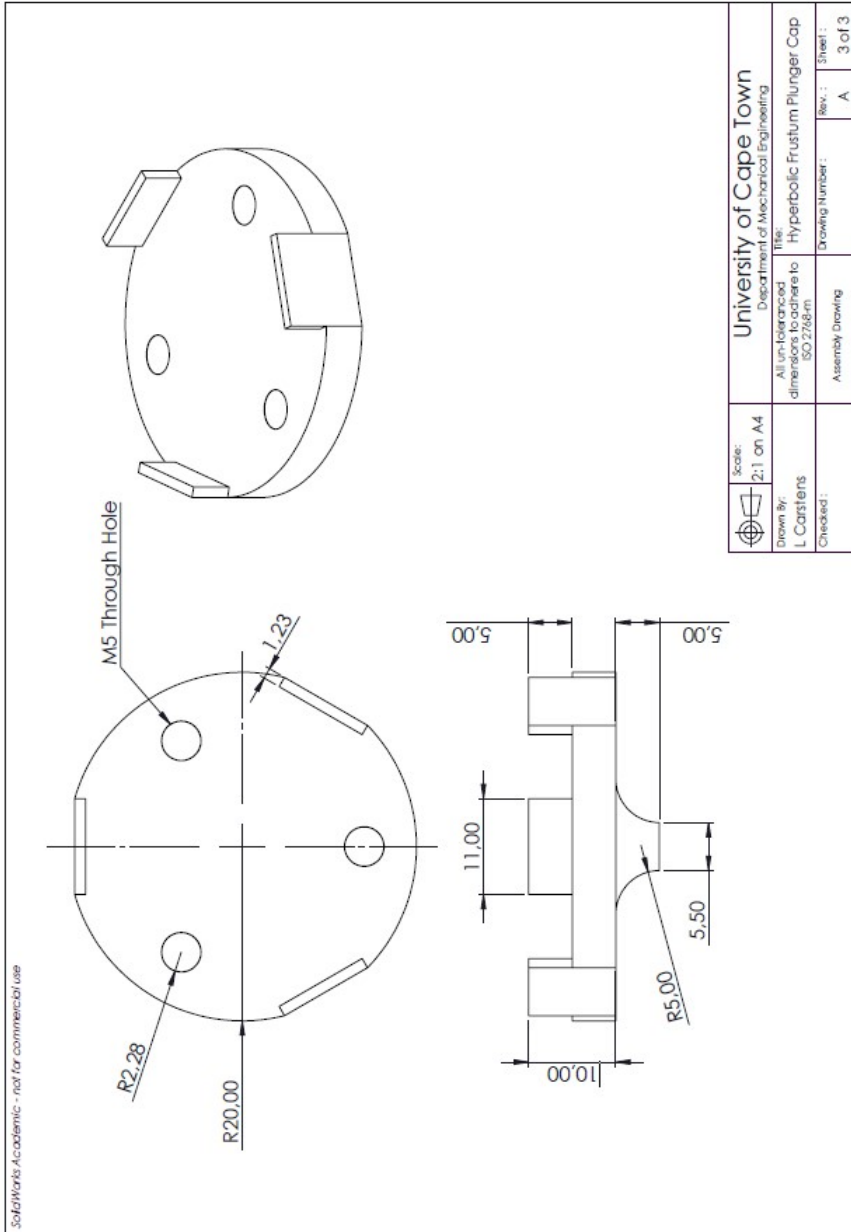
Part drawing for the hyperbolic frustum plunger cap.
